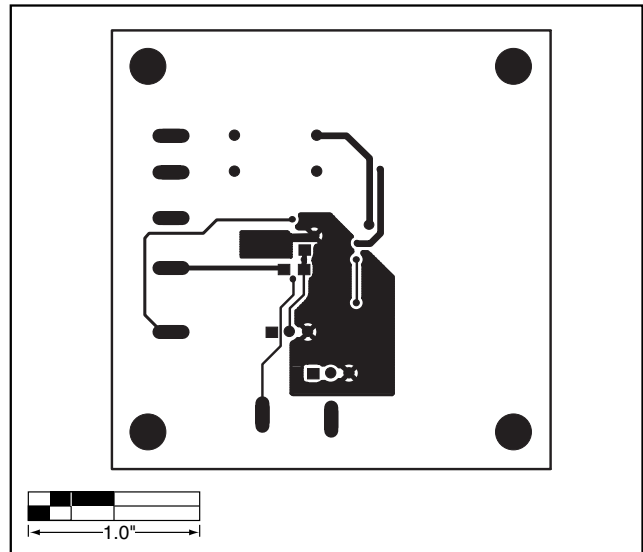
MAX1744 EV Kit PC Board Layout—Solder Side
